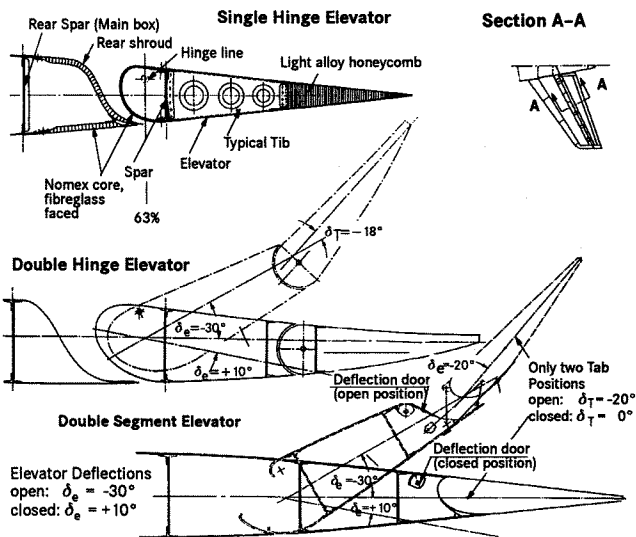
Alternative Elevator Concepts for Fixed Tail
